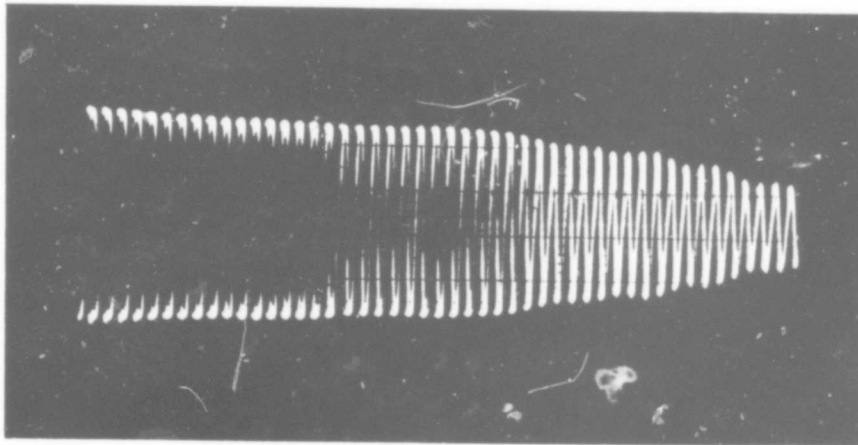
TRANSDUCER OVER FLAW AREA ON MOTOR SECTION
